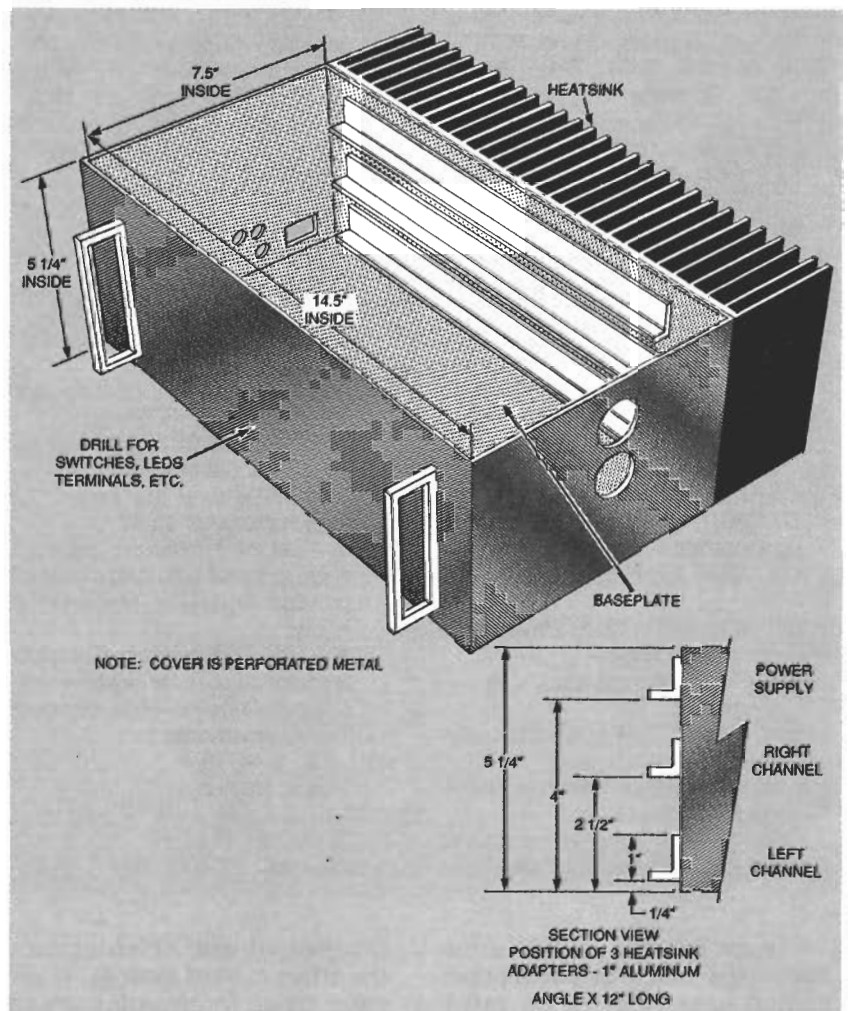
INSIDE CASE DIMENSIONS FOR THE HOME AMPLIFIER. These minimum inside dimensions are given for a case to be made by you or purchased. The locations for mounting the three aluminum heatsink adapters are also given.
